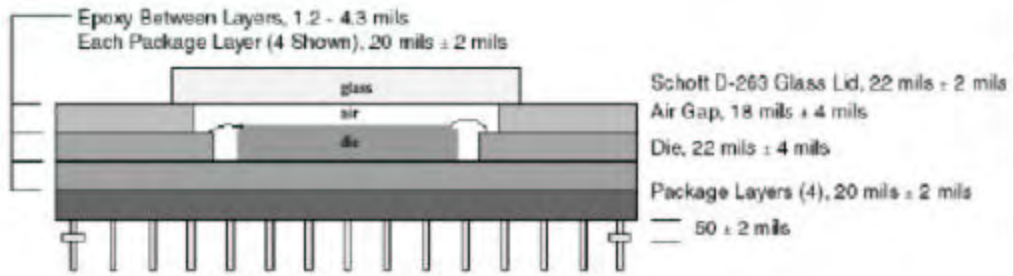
CMOS sensor drawing of HCC-1000 (Photobit Corp.)
